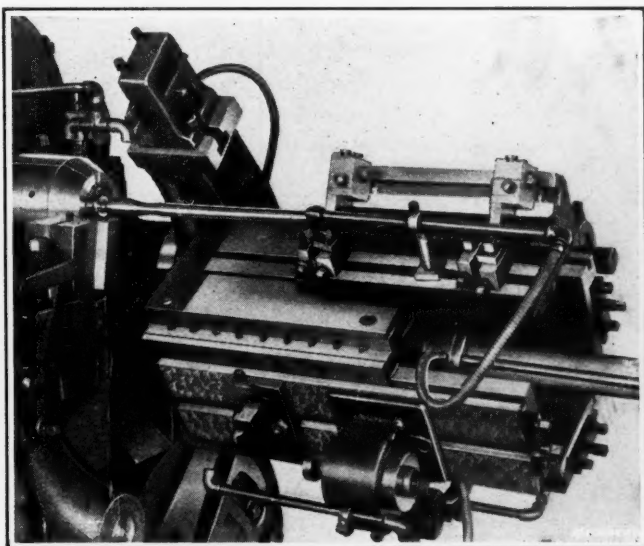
Finishing Slide shown in Fig. 21, in Operation on a Handle that is 14 Inches Long
